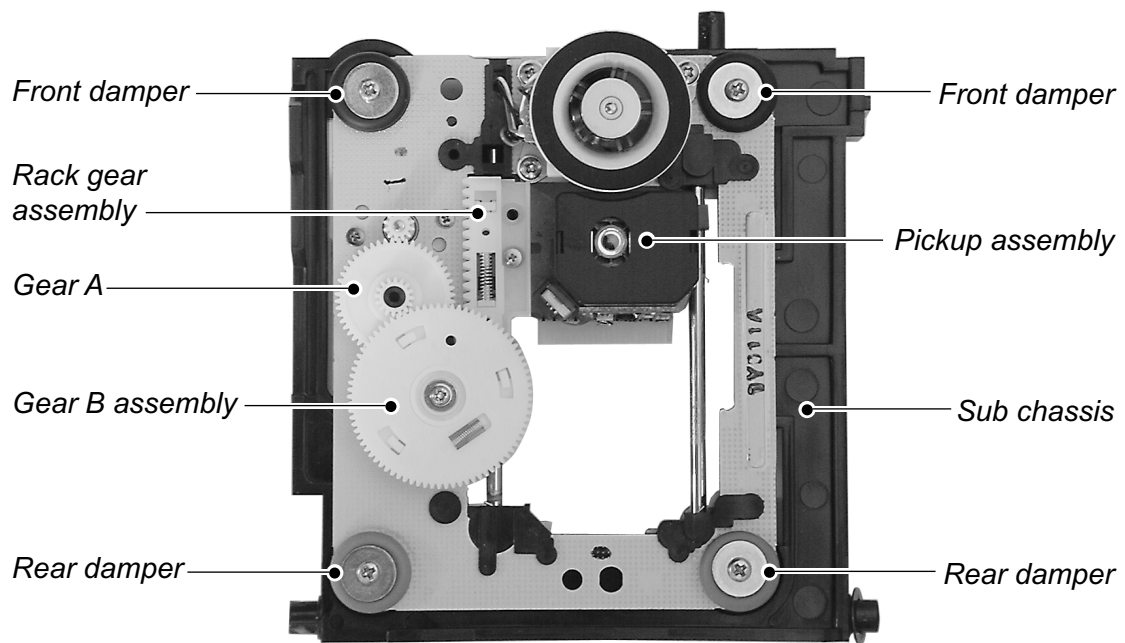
Mechanism chassis assembly (Top side)
